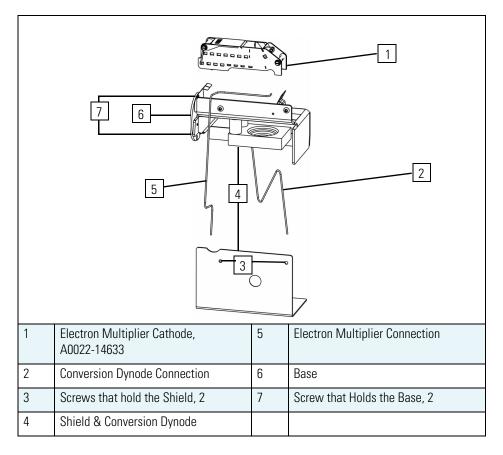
Ion Detector Assembly, Replacement Detector Assembly (without items 2 & 5)
